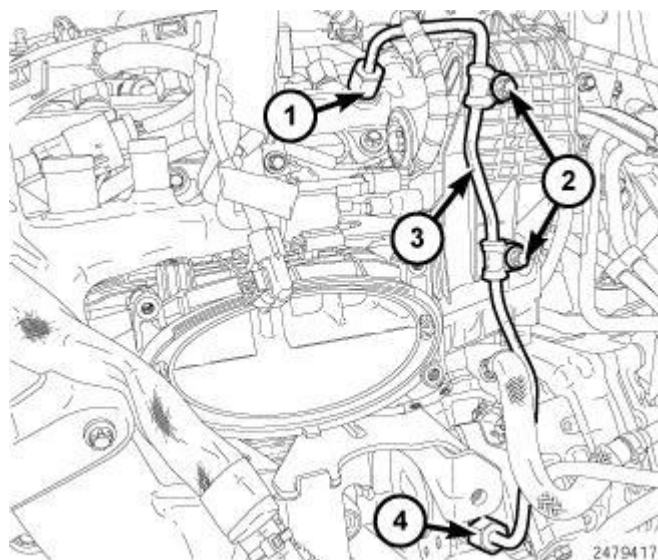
EGR Vacuum Solenoid & Bolts
